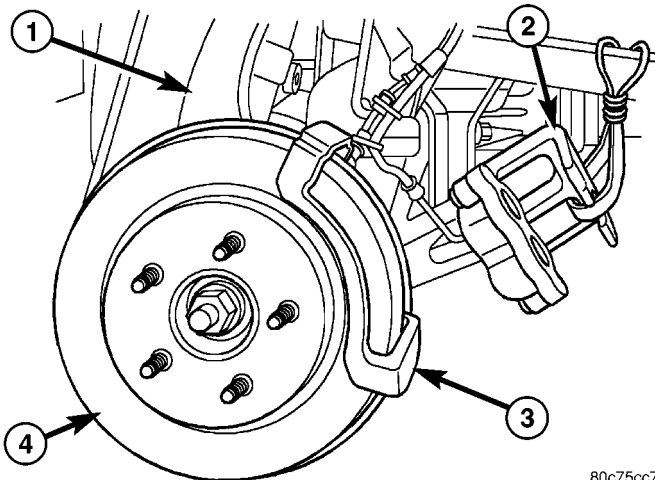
8 LUG ROTOR & CALIPER ASSEMBLY
